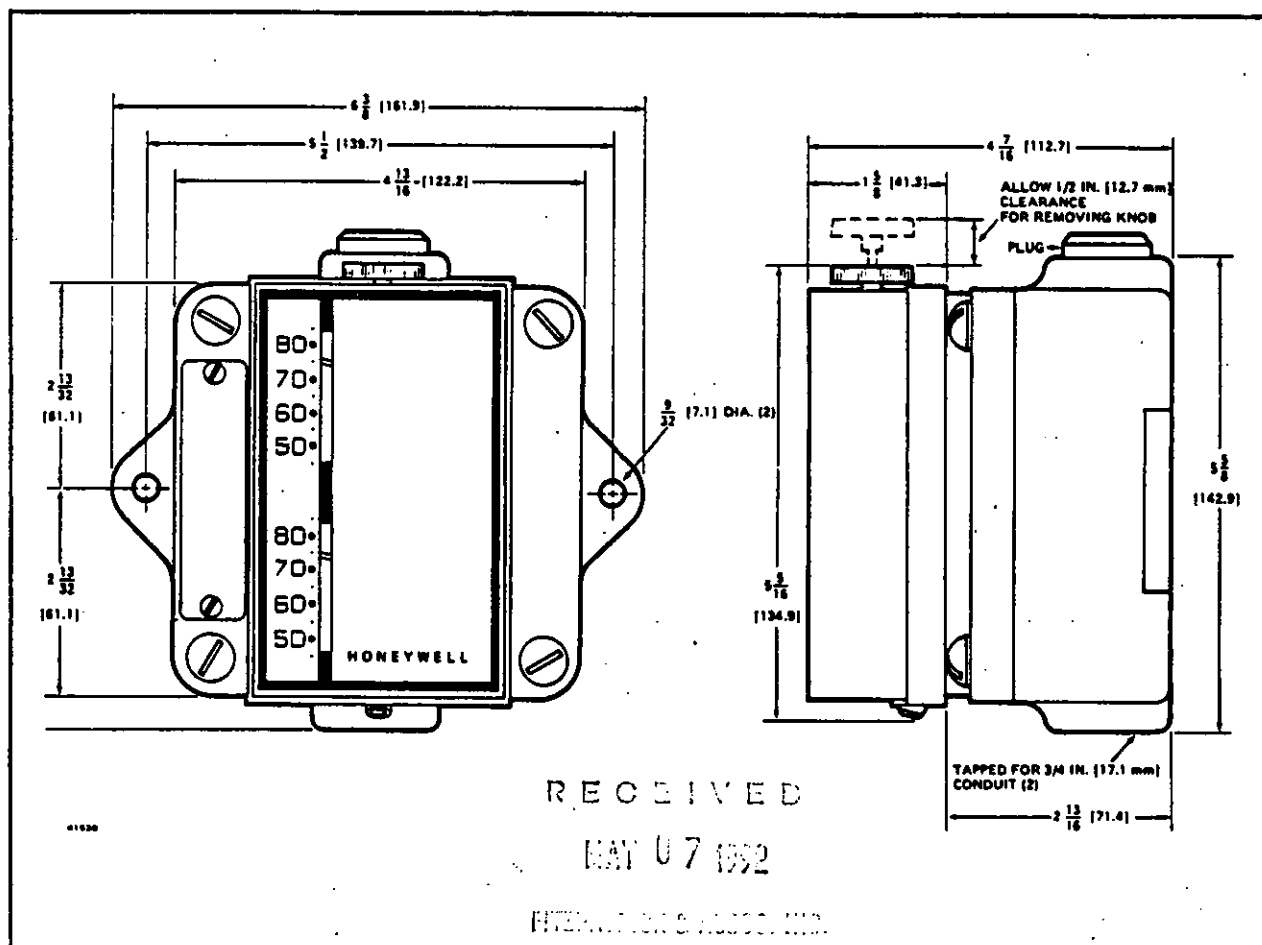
MOUNTING DIMENSIONS FOR T6051B IN INCHES [MILLIMETRES SHOWN IN BRACKETS].
